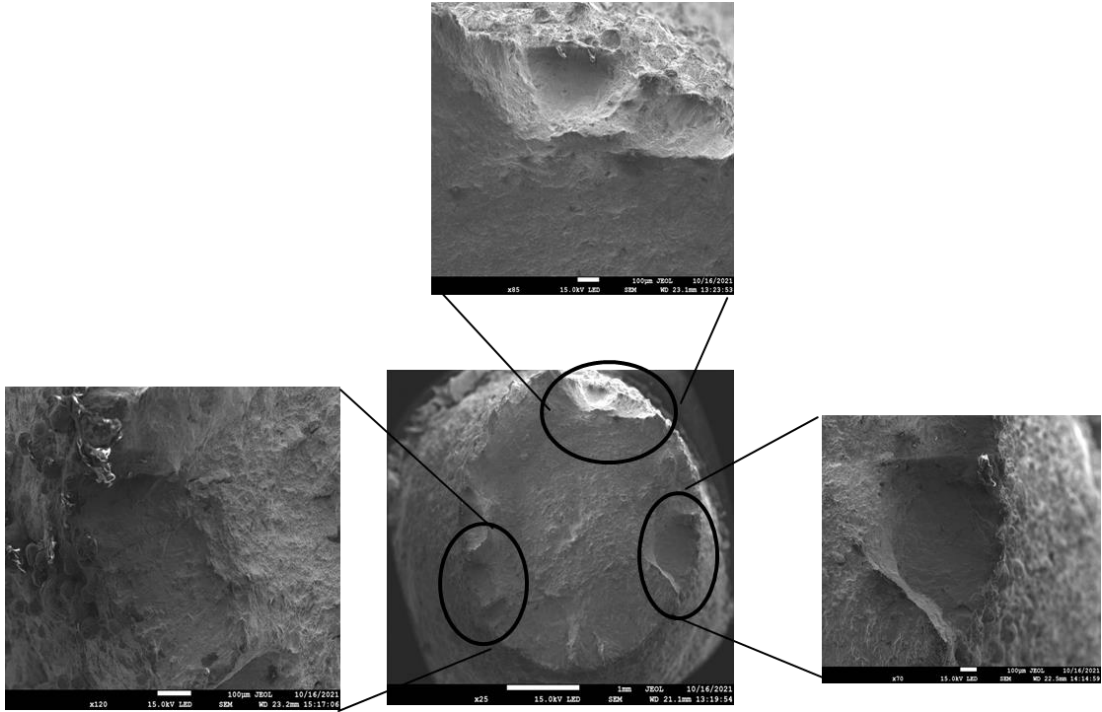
Fractography from fatigue sample 2 fabricated with 330 W.
